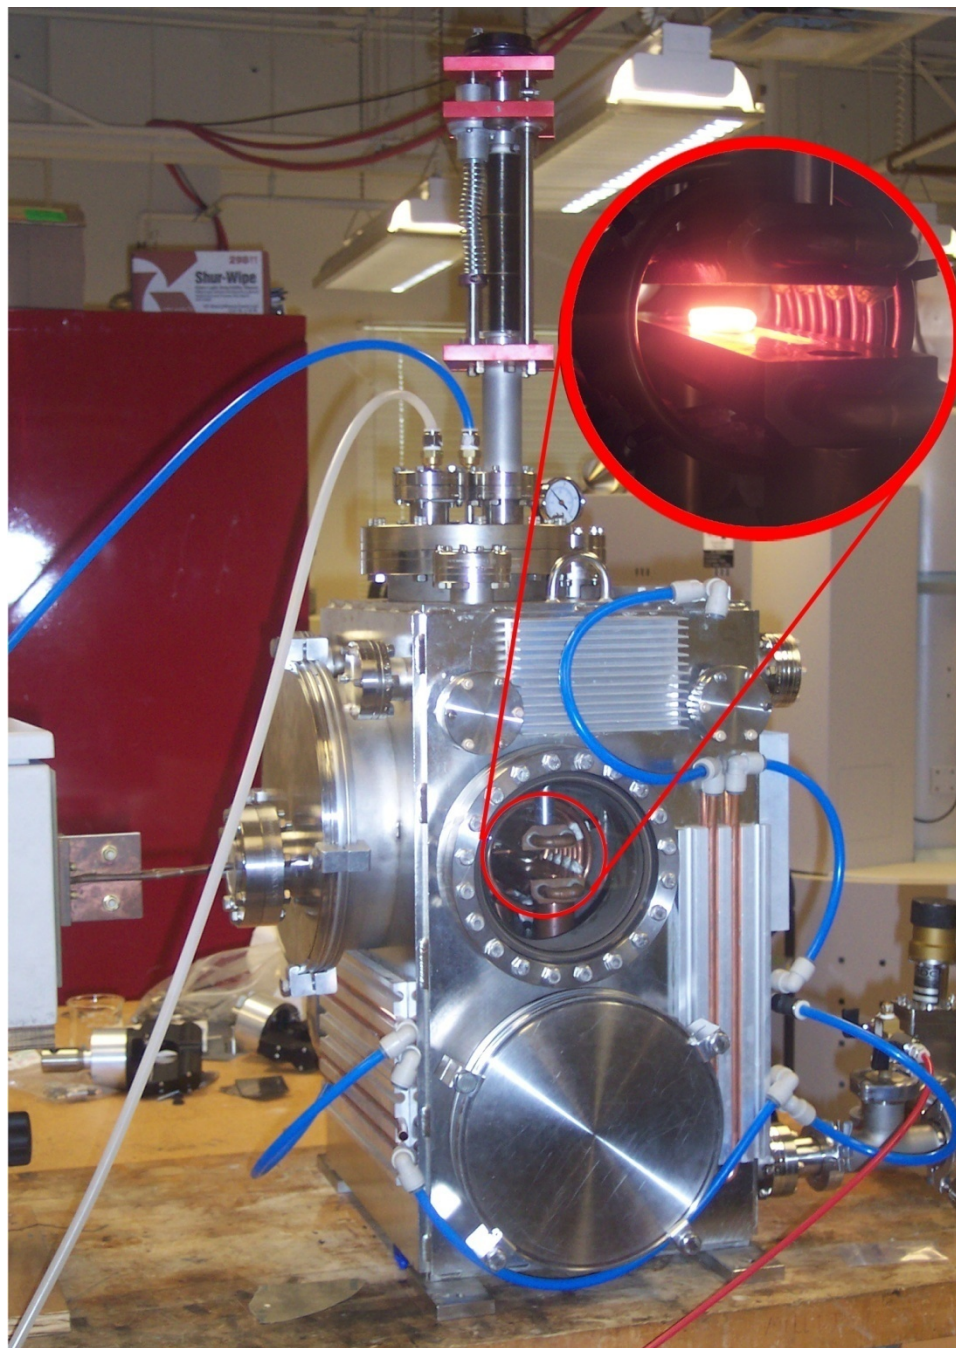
Second iteration of parallel plate copper mold assembly inside of large vacuum chamber. Inset shows close-up of induction coil and copper plates with 25 g sample being heated. This set-up is capable of melting 150g samples.
